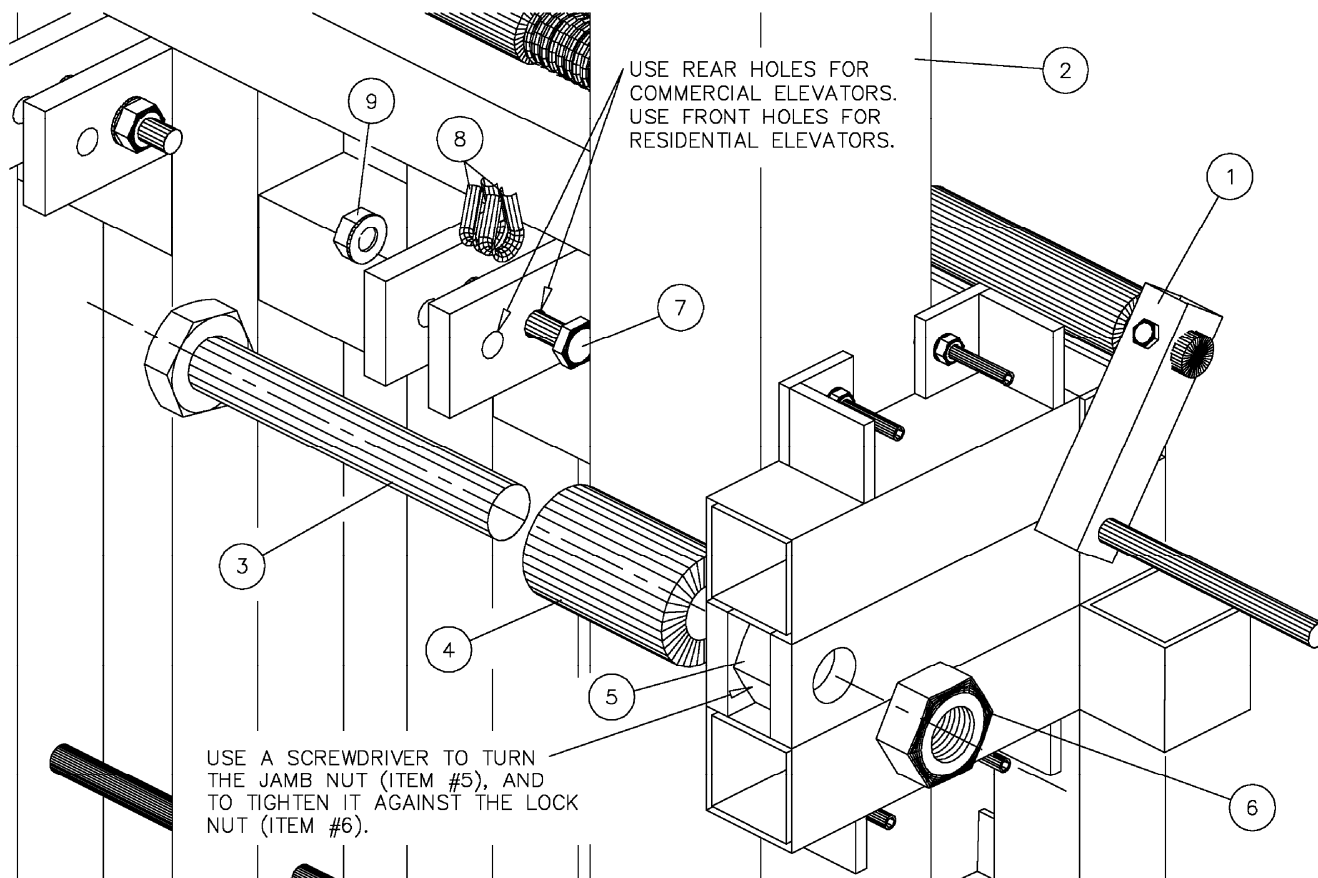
Installing the carriage guide frame on to the guide rails. Looking from behind the guide rails.
